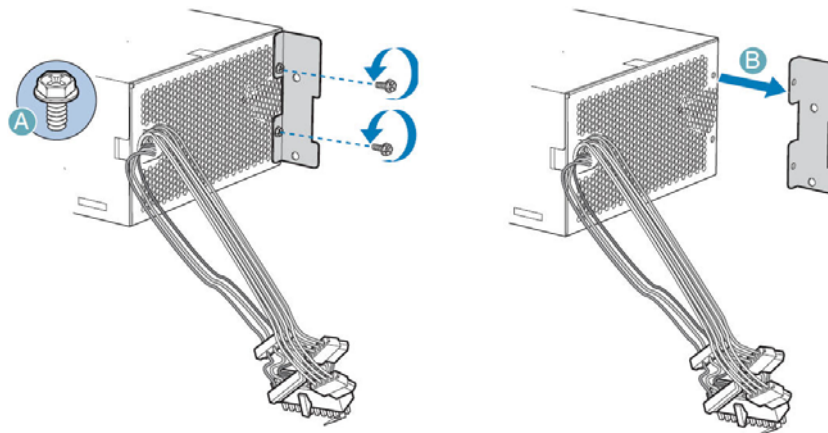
Removing Rear Support Bracket from Hot Swap Power Supply Cage
